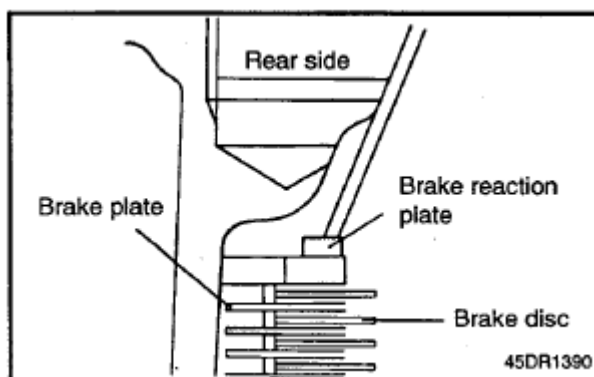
Identifying Brake Plate, Brake Disc, & Brake Reaction Plate
